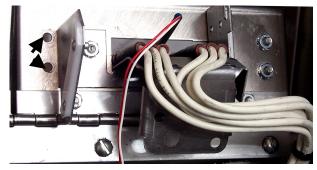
The new element support bracket includes the spring slide hardware. Remove and discard the old slide bracket. Reinstall the screws and nuts to fill the holes in the tilt plate on units with a shroud formed on the tilt plate. See arrows above. The holes are used to mount a shroud on older units. See Fig. 9.
